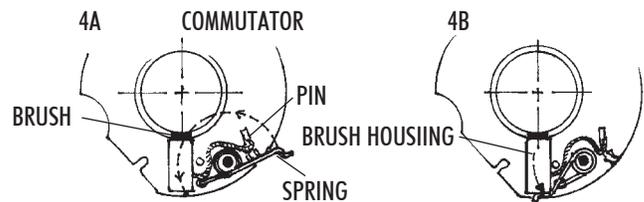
(A) Brush spring goes over pin with end of short arm in hole near edge of brush plate. (B) Bring long end of spring around counterclockwise and place it behind end of brush.
